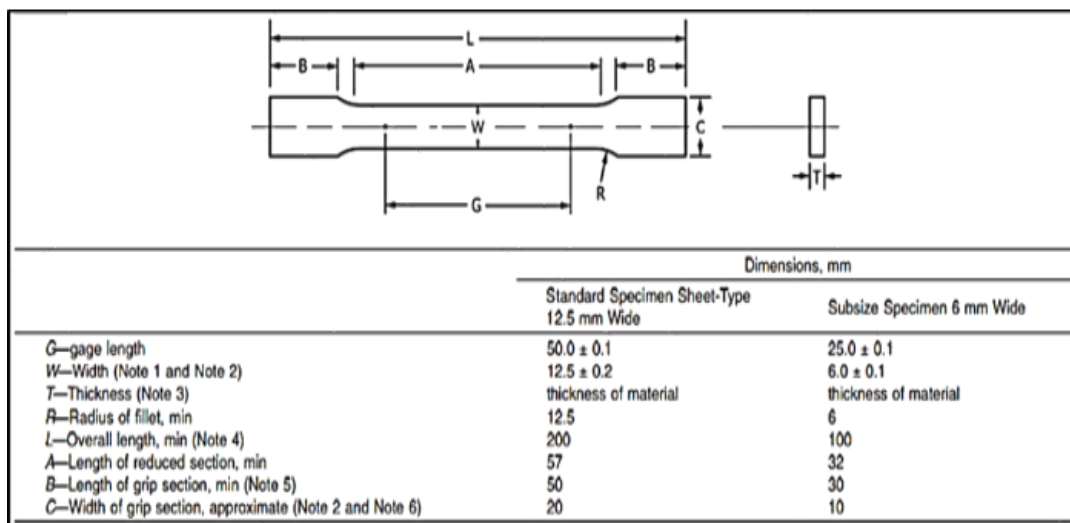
Drawing of ASTM E8/E8M standard for tensile testing
